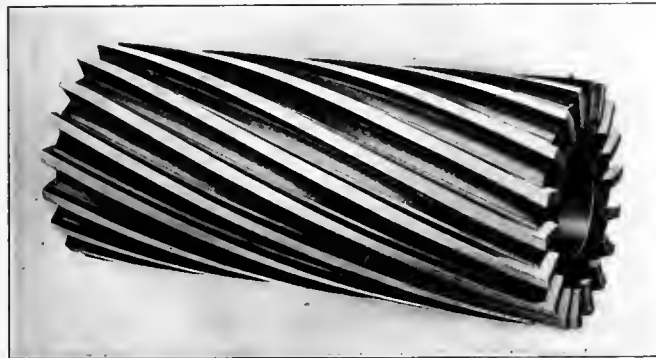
Inserted Blade High-speed Milling Cutter with Helically-bent Blades.
